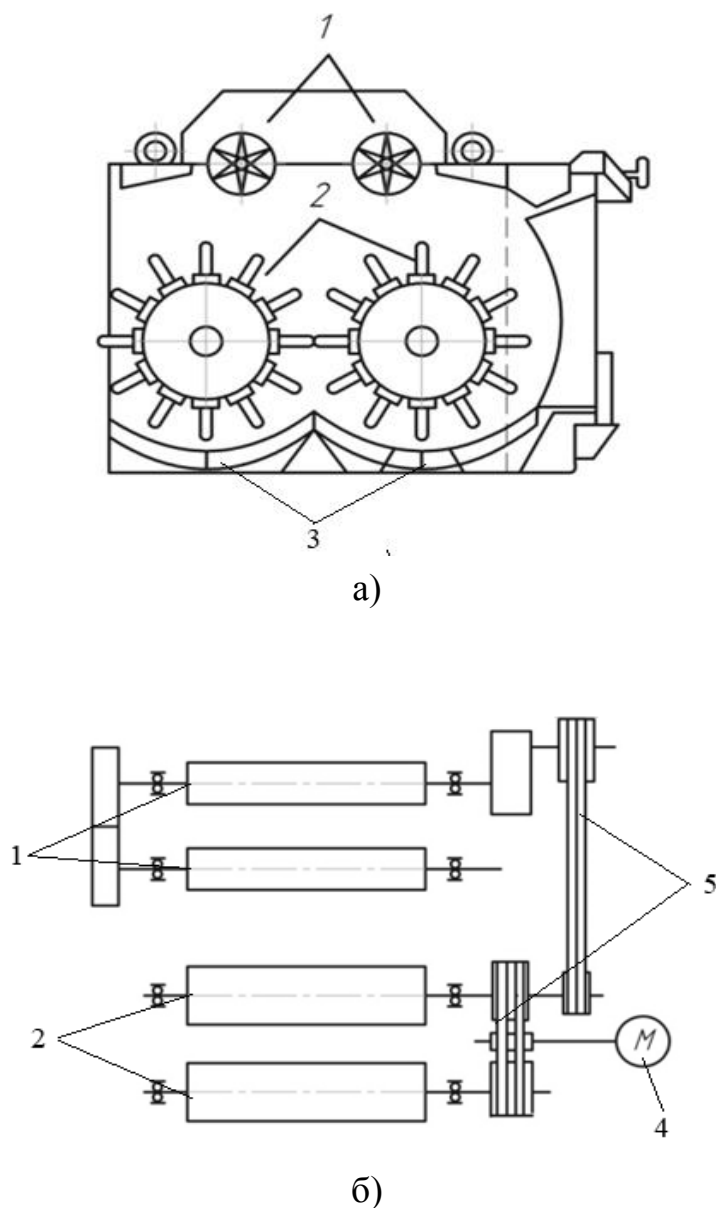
A feeding device used in cotton ginning machines.1-collecting shaft, 2-feeding rollers, 3-feed regulator, 4-drive gears.
